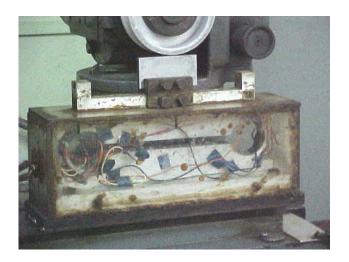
A typical strain – gauge type 2 – D grinding dynamometer
